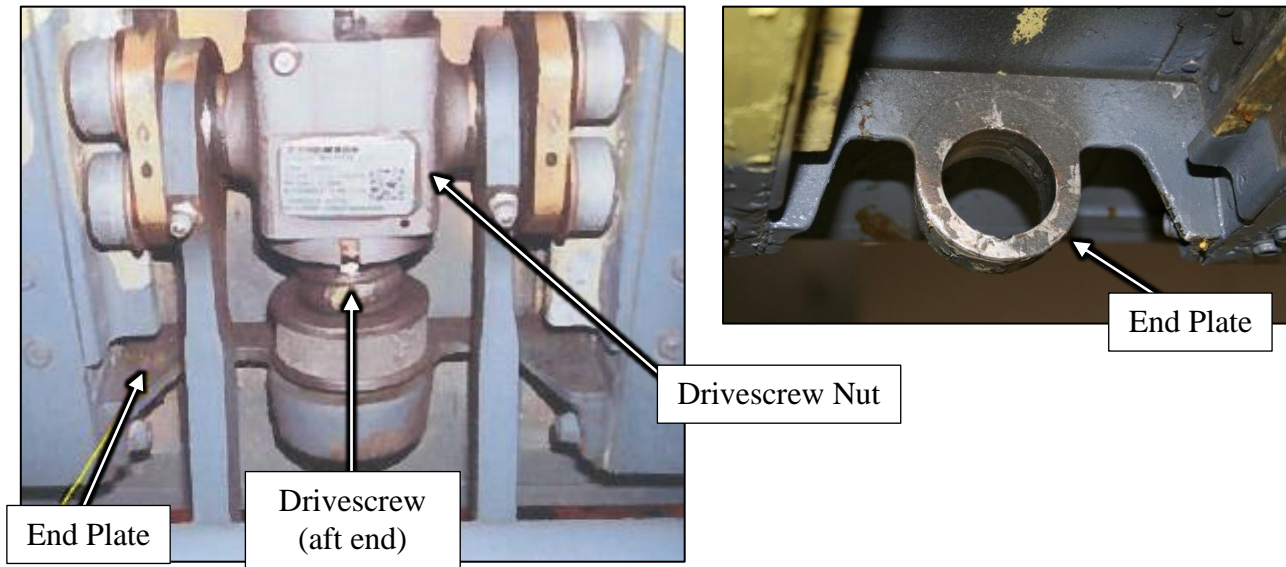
B-52 Flap Drivescrew Retainer Plug Installation
